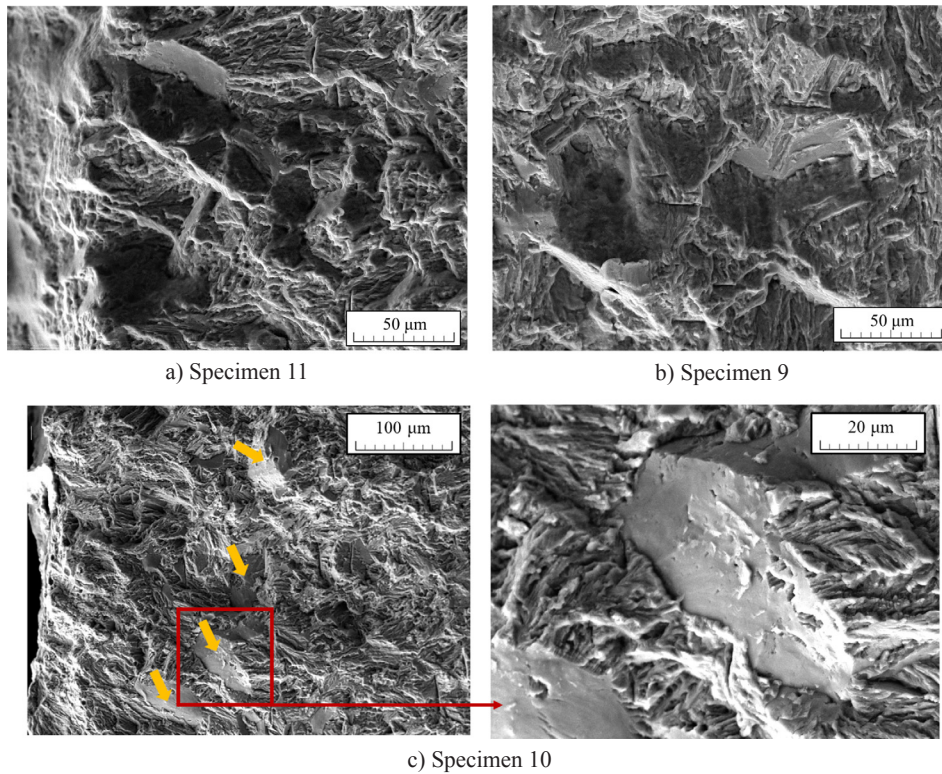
Intergranular fracture on the fracture surface.
